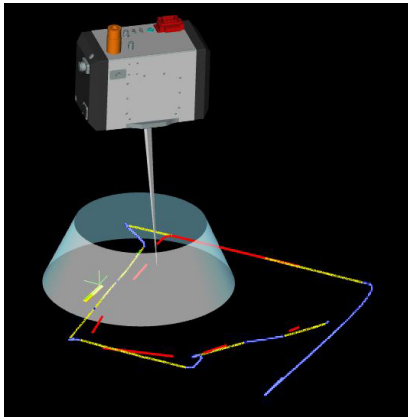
complete On-The-Fly program that includes the path of the TCP (blue line) as it's performed by the robot, welding groups (yellow lines) and actual weld seams (red lines).
